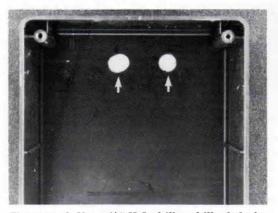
H. Use a 36'' H.S. drill to drill a hole for plugs.
